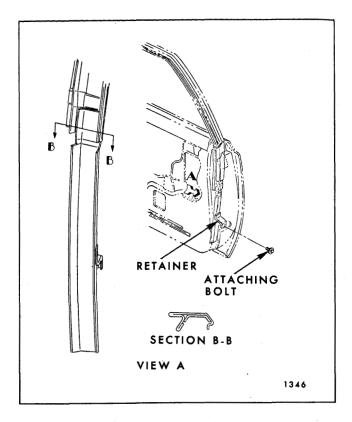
Door Window Glass Run Channel Lower Rear Retainer - "A" Styles
